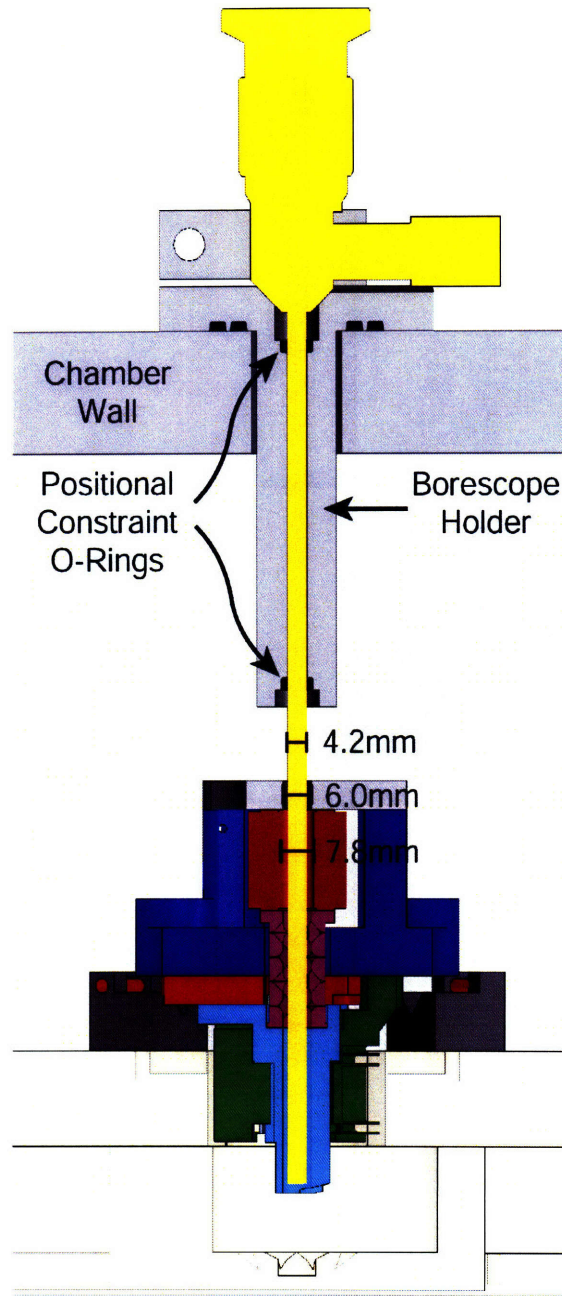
This cross section of the assembly solid model shows the clearance dimensions between the borescope and other mechanical features as well as the constraint of the instrument by two O-rings.
